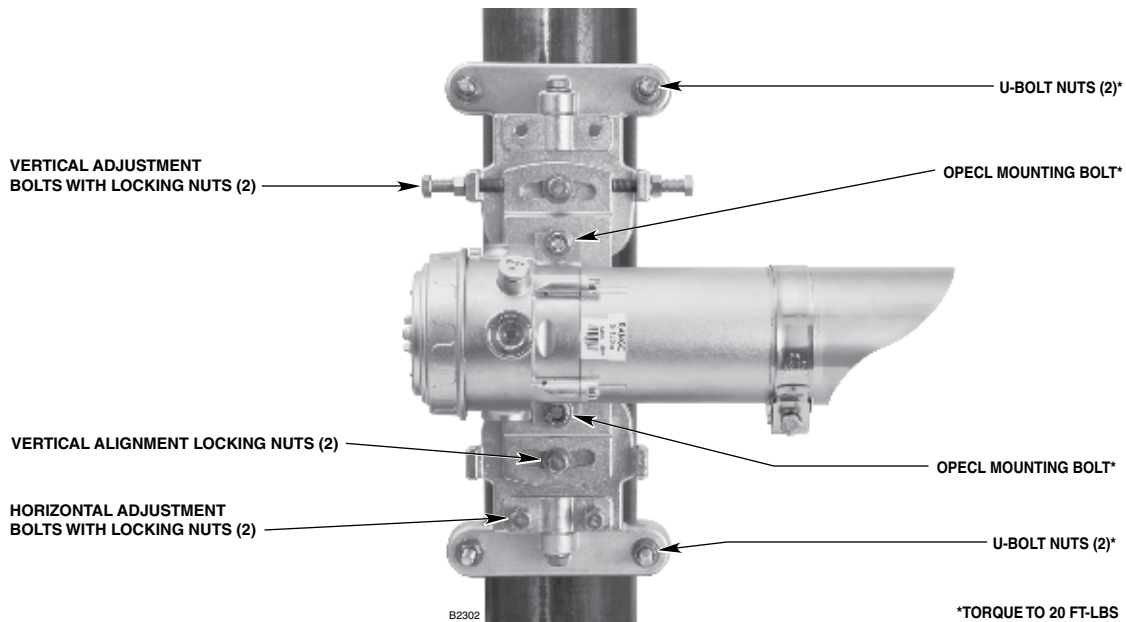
OPECL Mounting and Alignment Hardware (Transmitter Module Shown)
